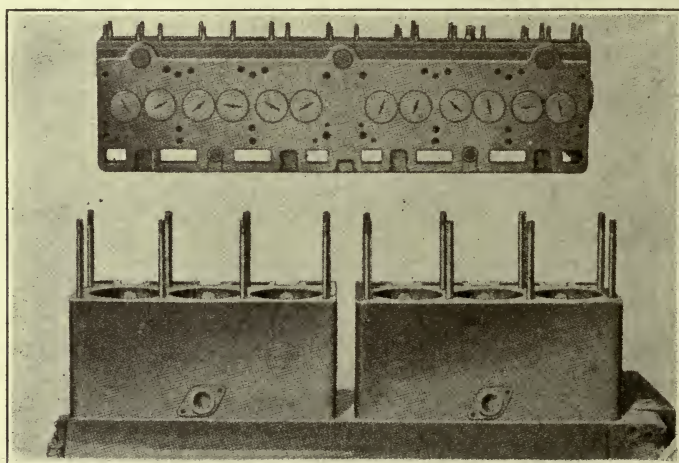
Marmon Cylinder Blocks with Head Removed.
